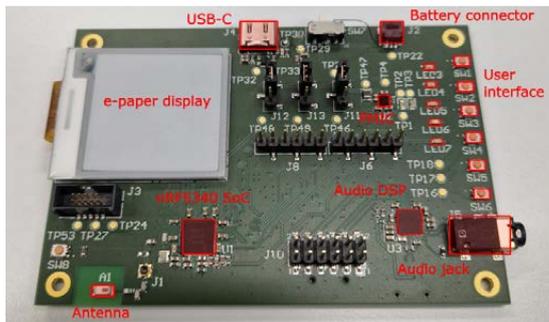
Manufactured Printed Circuit Board (PCB) of the designed smartwatch demonstrator.
